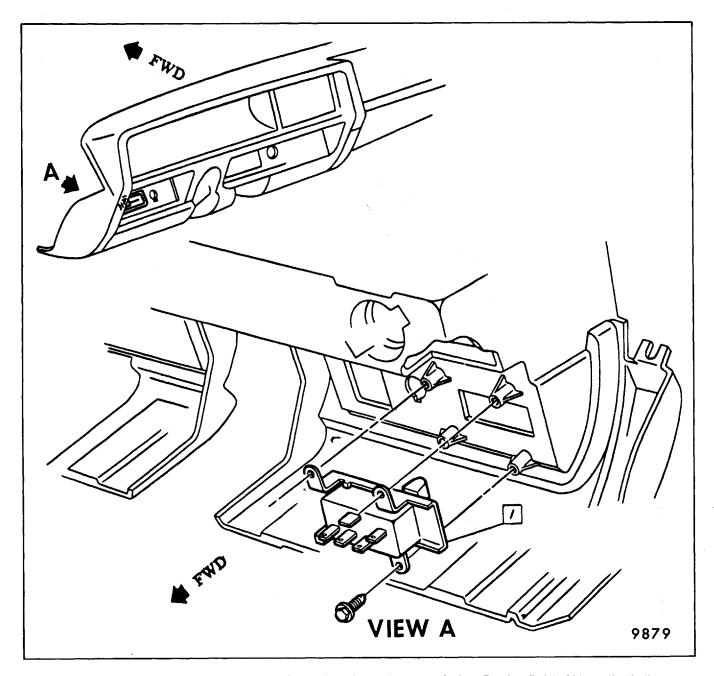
Windshield Wiper Switch Installation - Chevrolet H- 15, 27, 77 Styles - Pontiac, Buick Oldsmobile Similar
